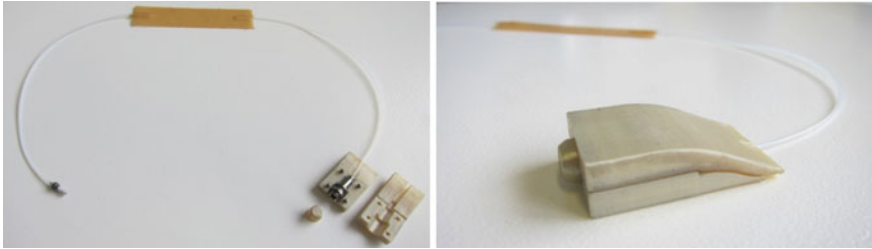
3D-printed ULTEM* 9085 connector casing assy
